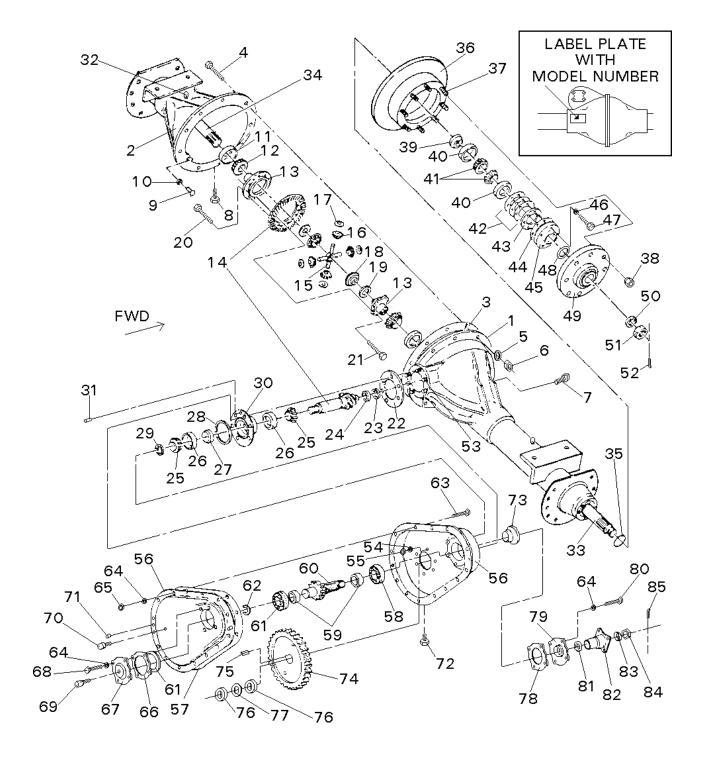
Rockwell Drive Axle and Reduction Gear Assembly
